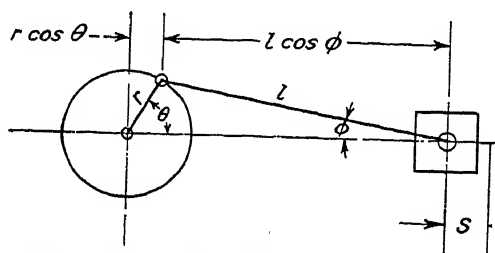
Diagram showing the geometry of rod and piston positions.
